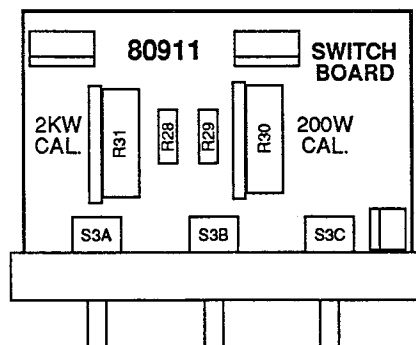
80911 SWITCH BOARD COMPONENT LAYOUT
